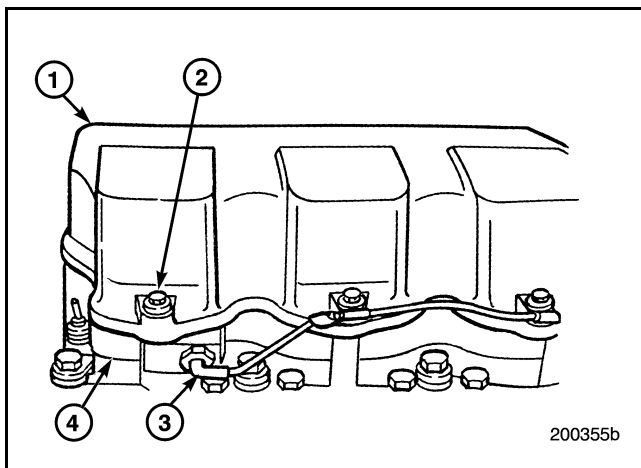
J-Tech™ Cylinder Head Cover and Spacer
